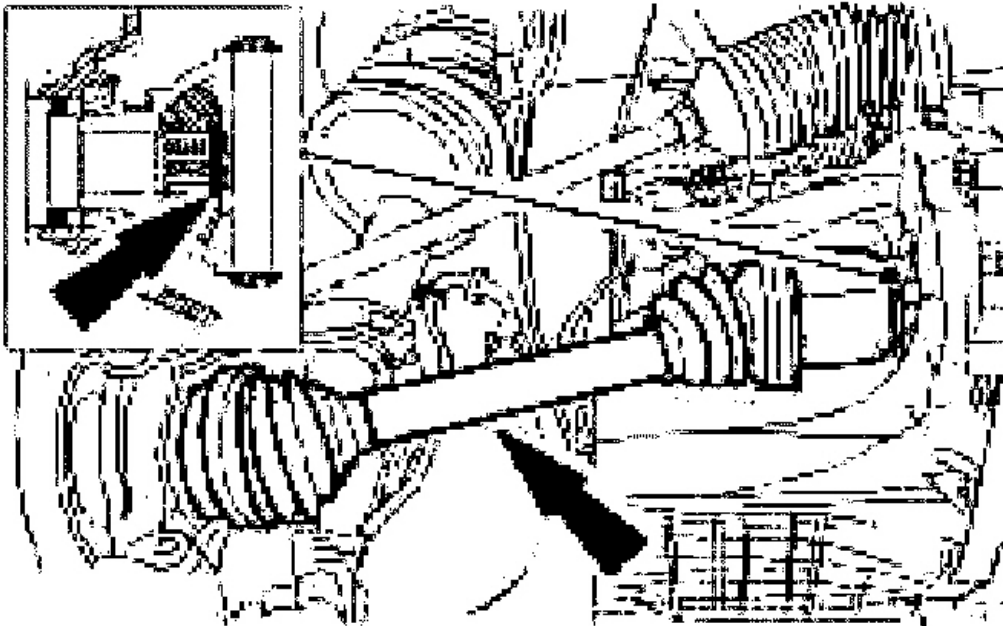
Installing Right-Hand Input Shaft With Intermediate Shaft
